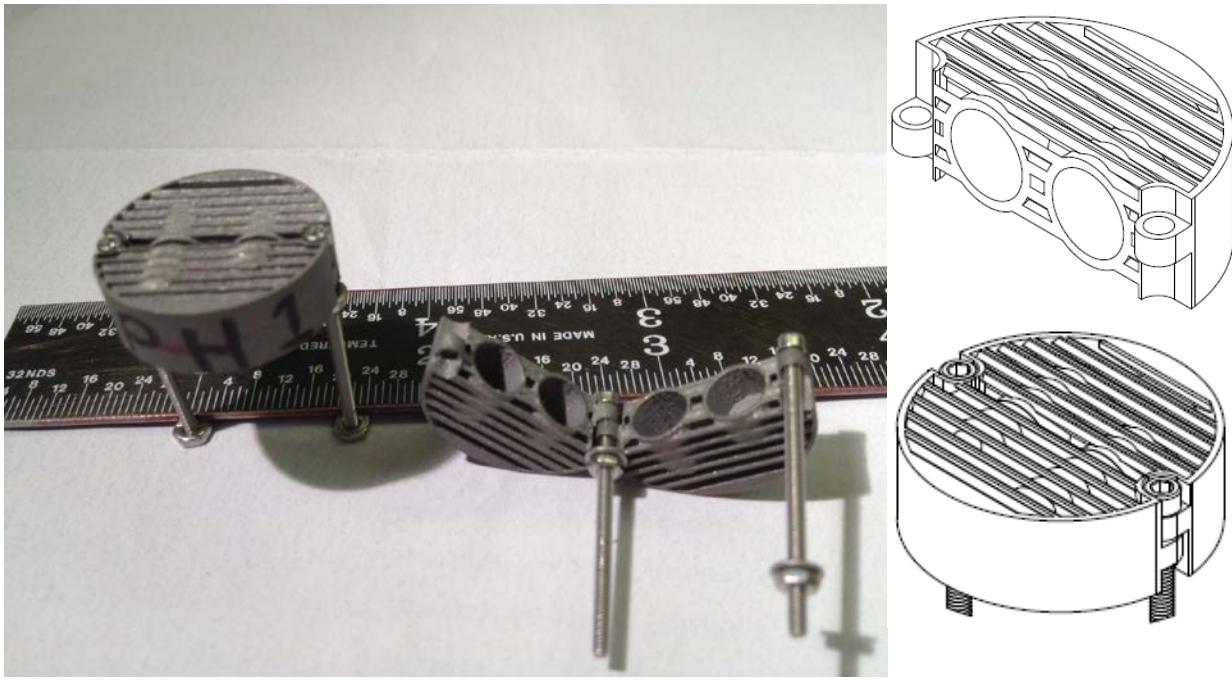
(Left) Photograph of the stainless-steel two-part heat exchanges that contained the two $^{235}\text{UO}_2$ fuel pellets. (Right) Three-dimensional renderings of one of two identical pieces (upper) that are shown joined together by two 0-80 machine screws.
